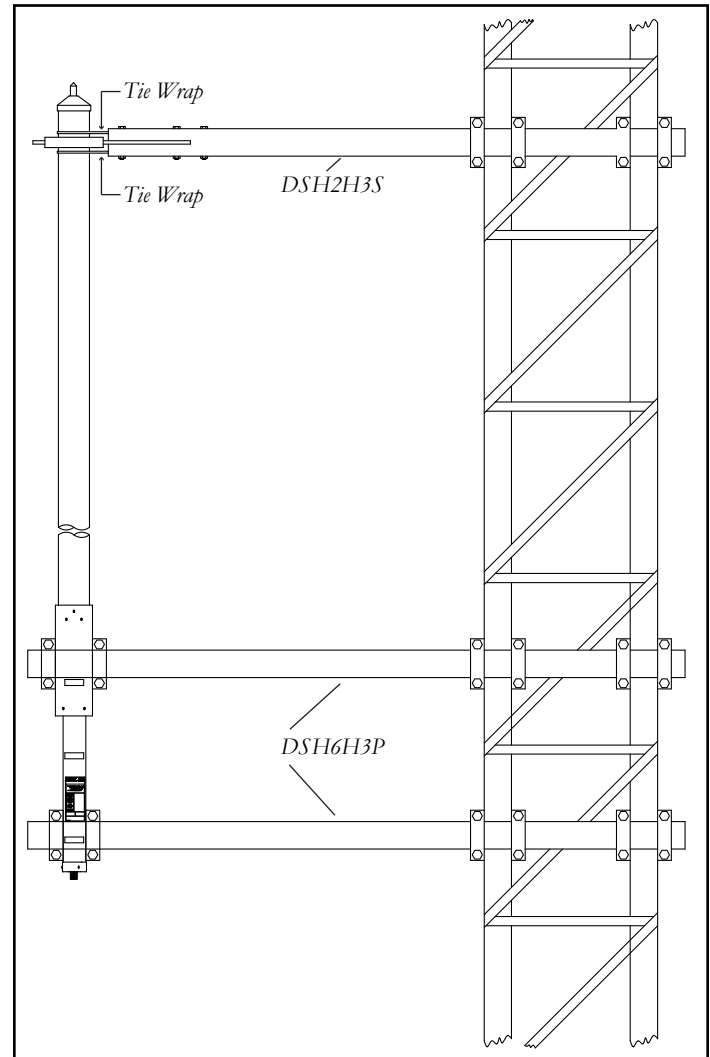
Example of Antenna Showing DSH2H3S Series Fiberglass Outrigger Assembly and DSH6H3P Adjustable Side Mount Kit.
